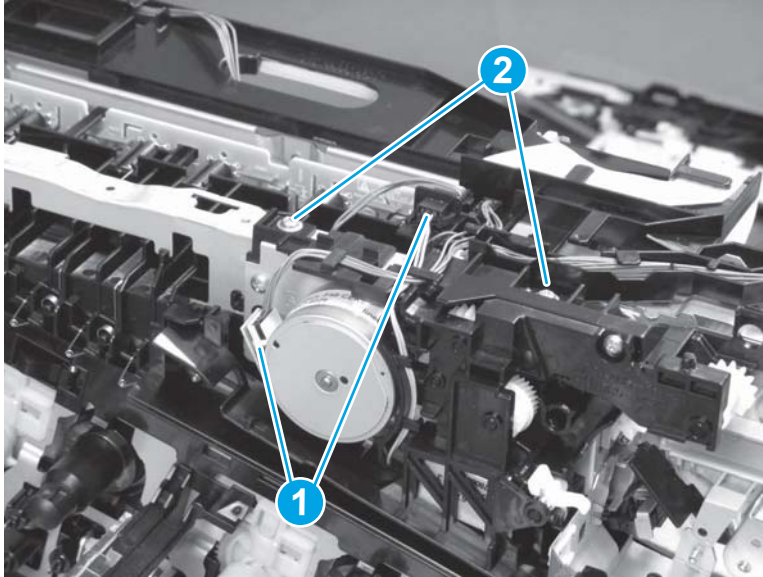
Remove the duplex switchback assembly and delivery assembly
